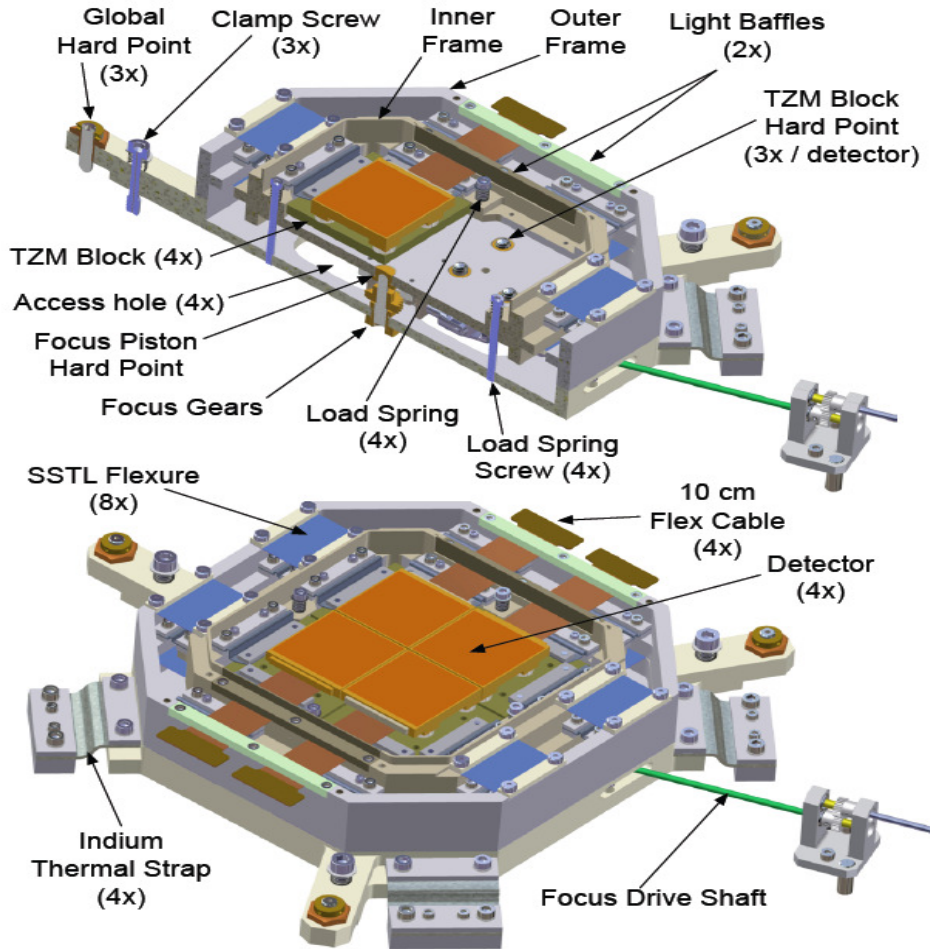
The top drawing shows a cutaway view of the detector module. One detector has been removed to show its three hardpoints, each adjustable from behind the module through the access holes. Indium straps provide thermal contact between the frames but are hidden in this view. The top of the module is covered by a plate used to reduce scattered light, but not shown for clarity. The bottom drawing shows the entire module.
